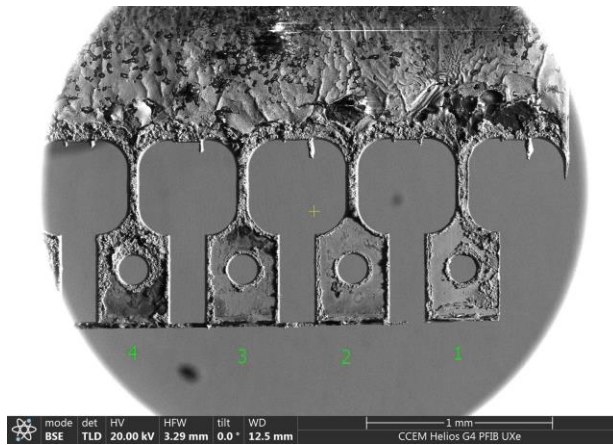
Final geometry cutouts of the fs-laser-machined micro-tensile specimens on wedge 1 (with applied nail polish on the surface).
